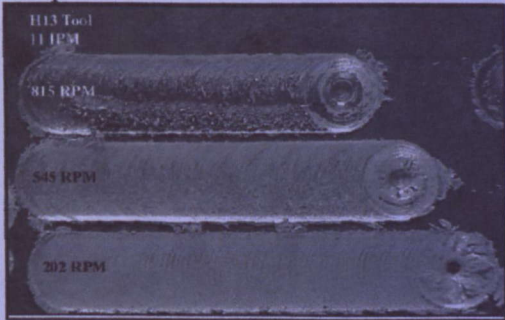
FSW using H-13 steel welding tool with 11IPM and variable RPM[7]
